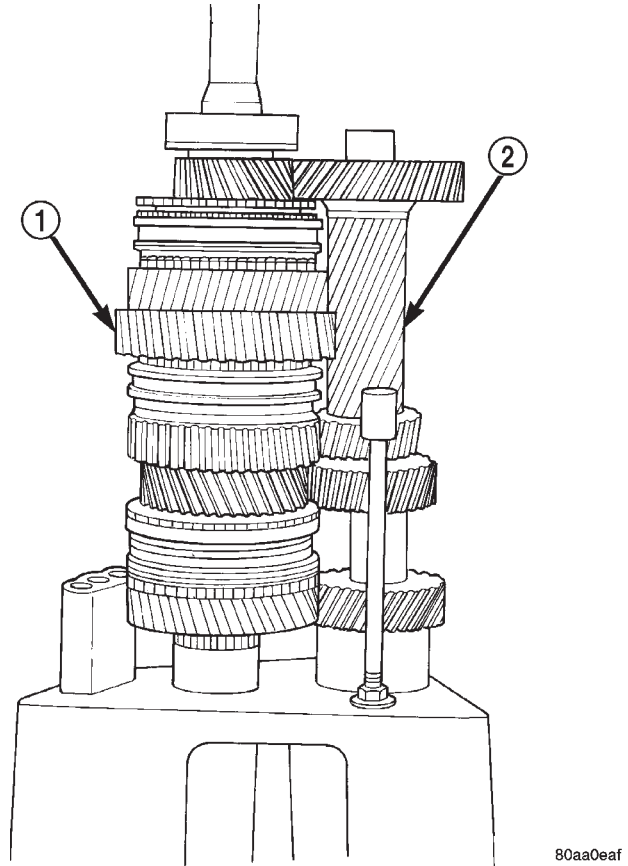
OUTPUT SHAFT AND GEARTRAIN
